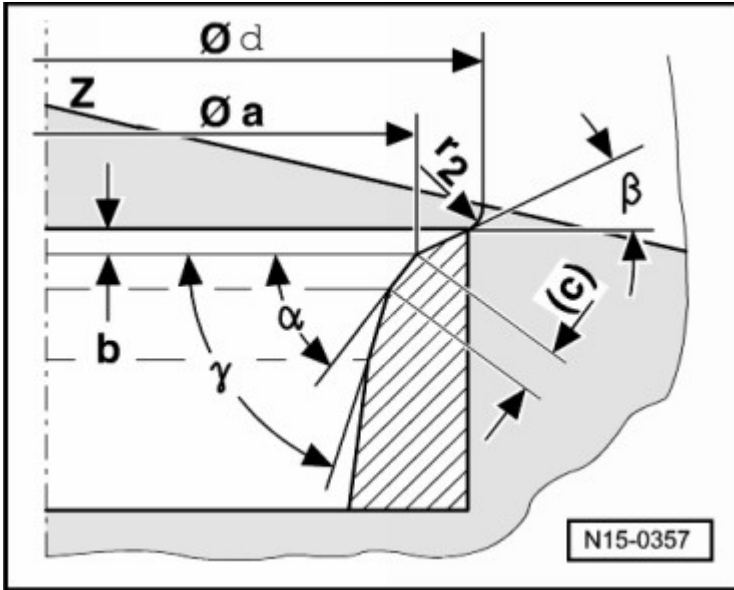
Identifying Angles And Dimensions To Rework Exhaust Valve Seat
